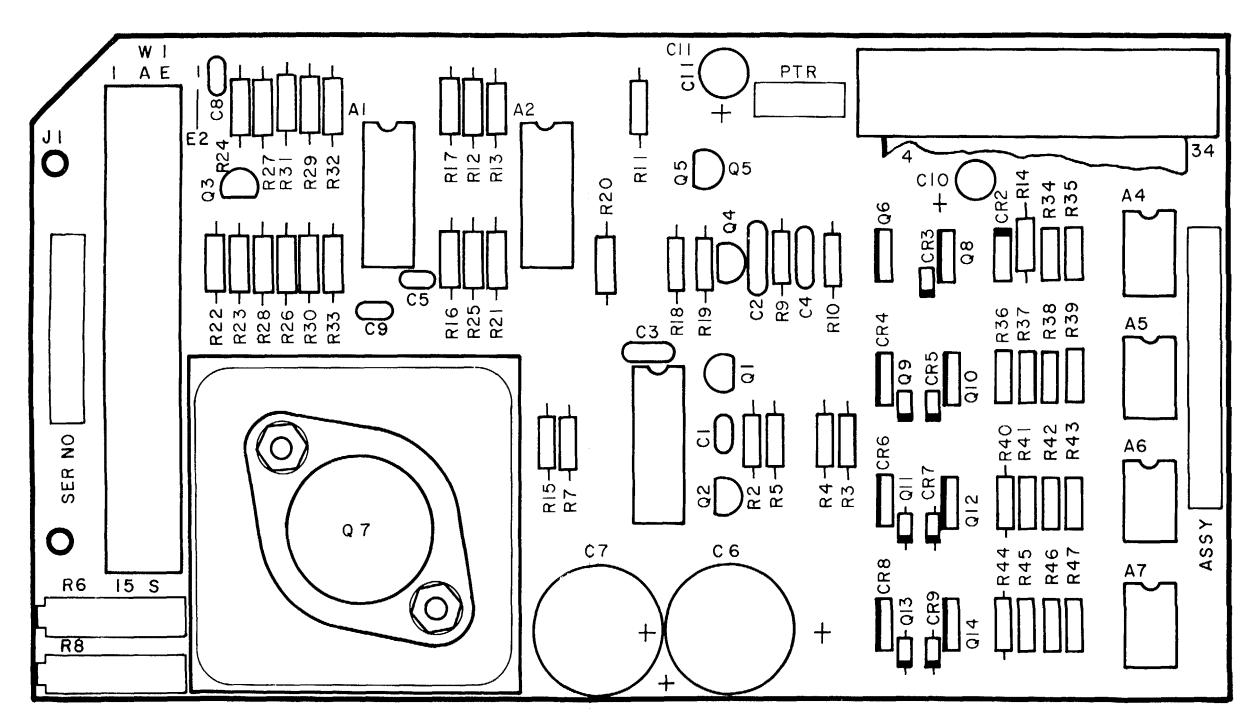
Printer Driver Board 0100-2723 Assembly Drawing
